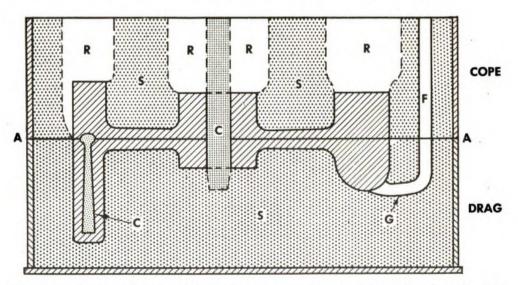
Cross section of mold showing component parts. AA-parting line; R-riser; C-cone; F-runner or sprue; G-gate; S-sand
